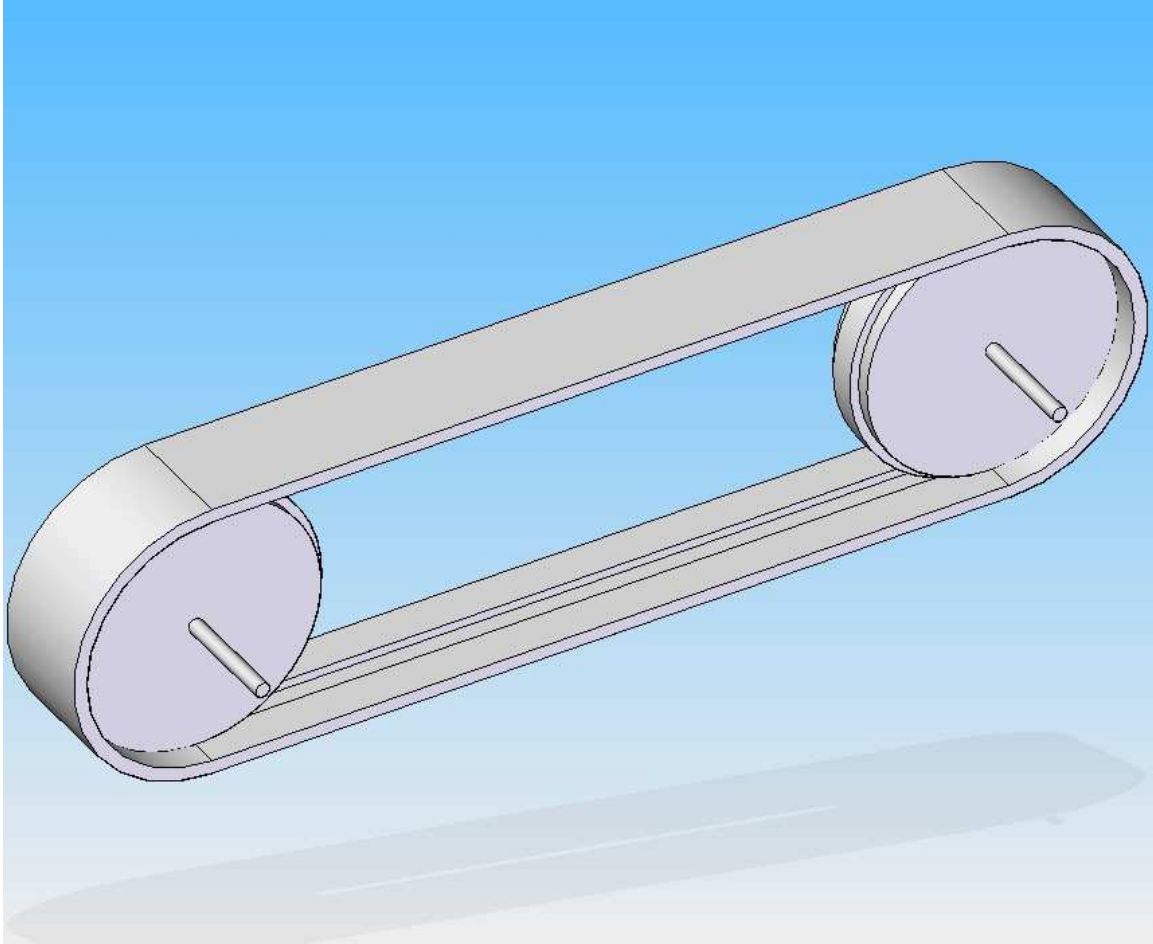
Preliminary Tread and Wheel Assembly
